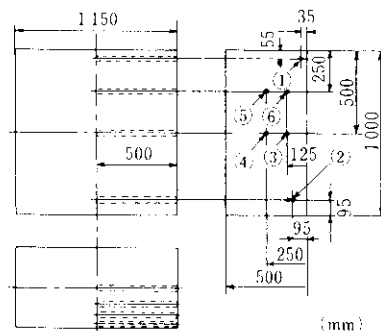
Dimension of 500mm thickness trial forging and installing positions of thermo-couple
